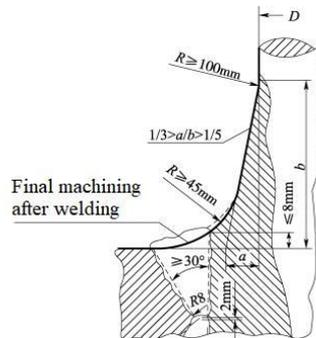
Welded joint between rudder stock and coupling flange
